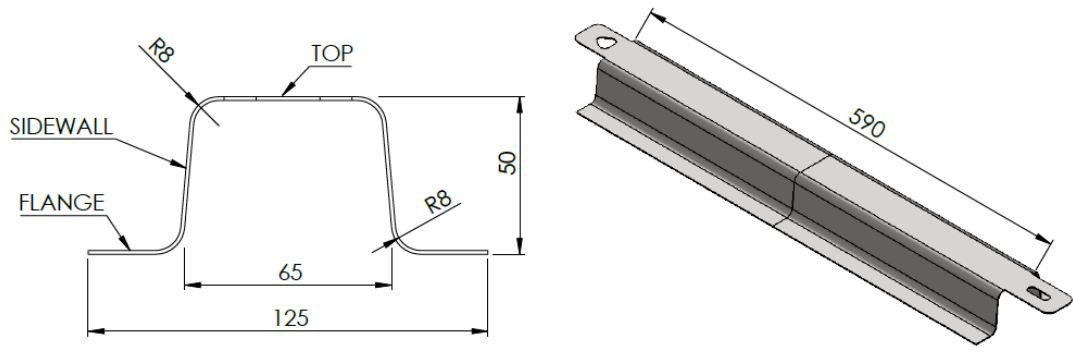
Dimensions of formed top hat channels. Dimensions in millimeters.
